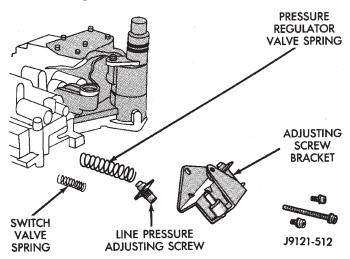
Adjusting Screw Bracket And Spring Removal—46RH
